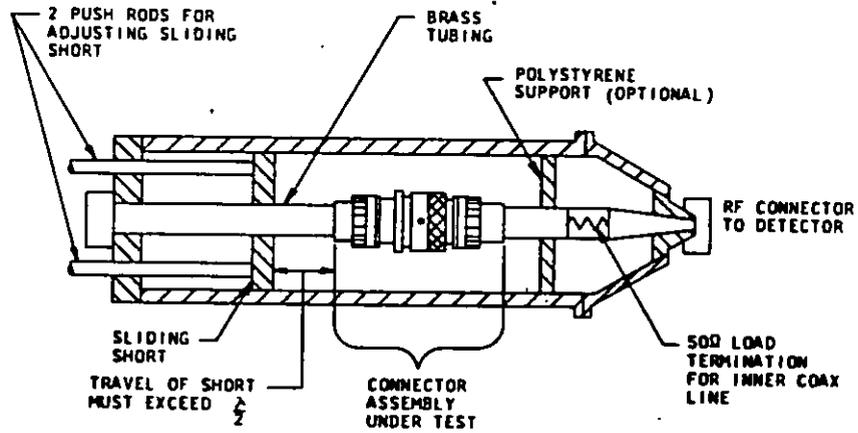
RFI leakage test fixture. (See 4.7.24.)
